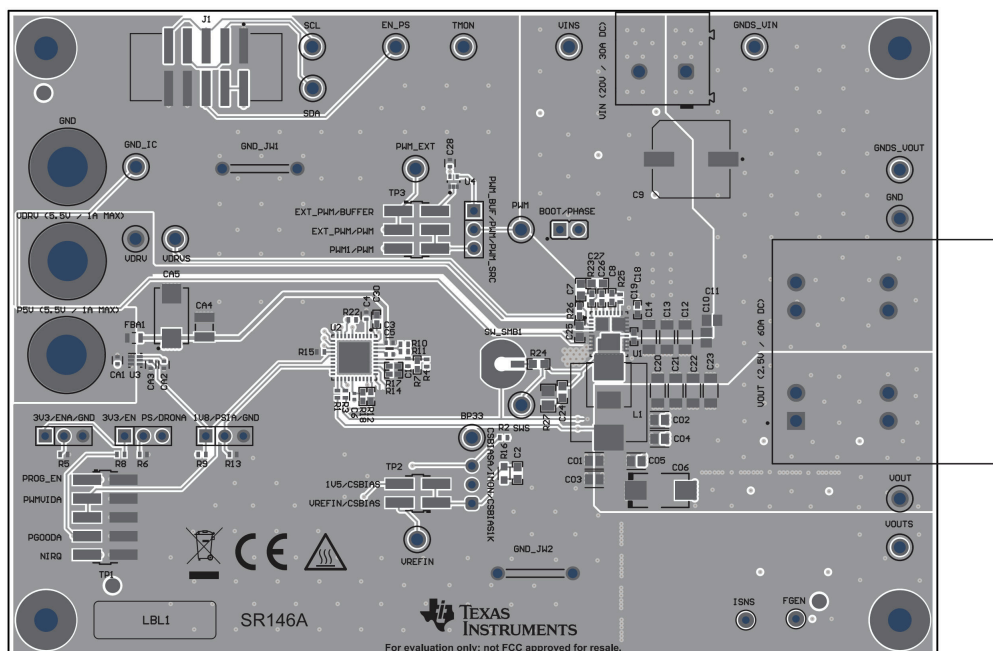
SR146A CSD967201-Q1EVM Component View (Top View)
